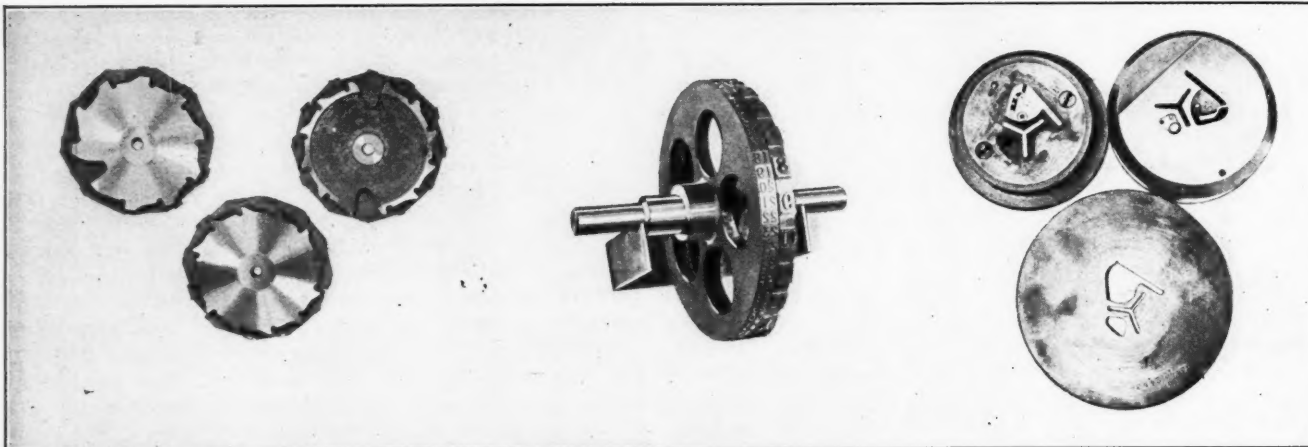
Steel Wheels, with both Ratchet Teeth and Figures on Rim, cut in Engraving Machine
